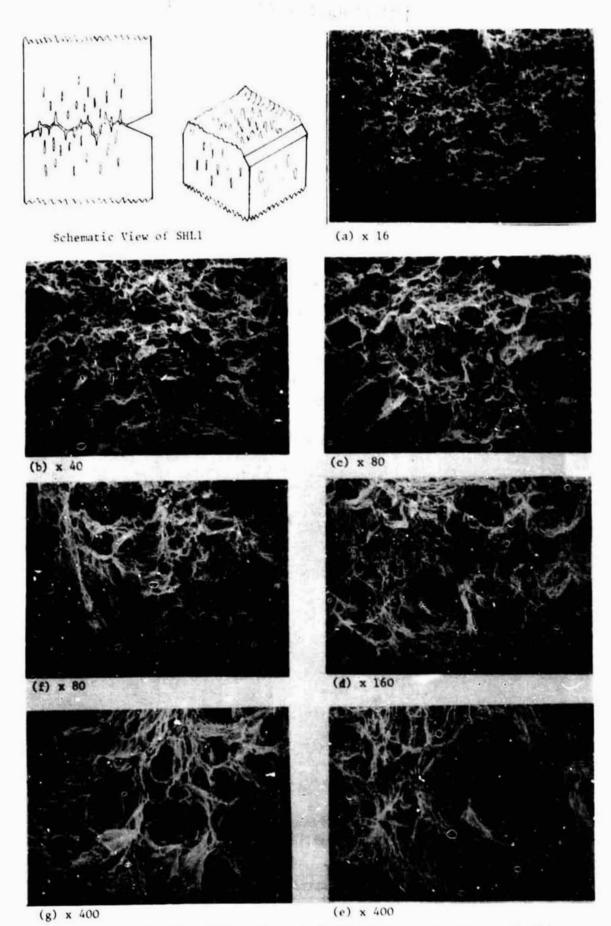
STEREOSCAN VIEWS OF 77K CHARPY FRACTURE SURFACES OF DESENSITIZED N-40 WITH & FERRITE ORIENTED PARALLEL TO BAR (Roll No.2038)
